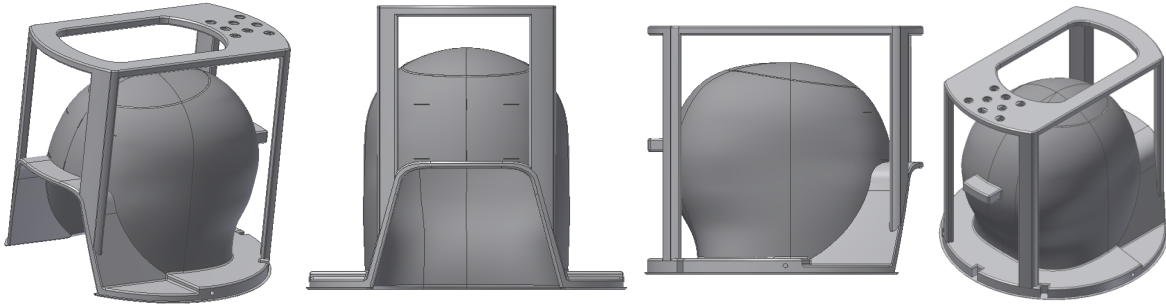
“Helmet” array mechanical design, including strain relief and supports, BNC bulkhead mounting provision, and alignment supports for the 30 cm TX coil.
